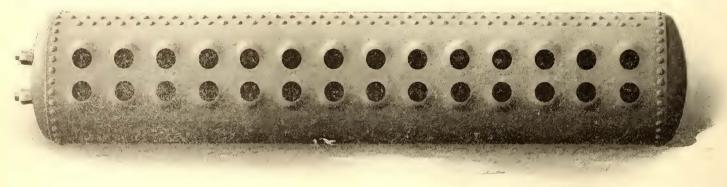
AUXILIARY DRUM FITTED WITH PRESSED TUBE SHEET
